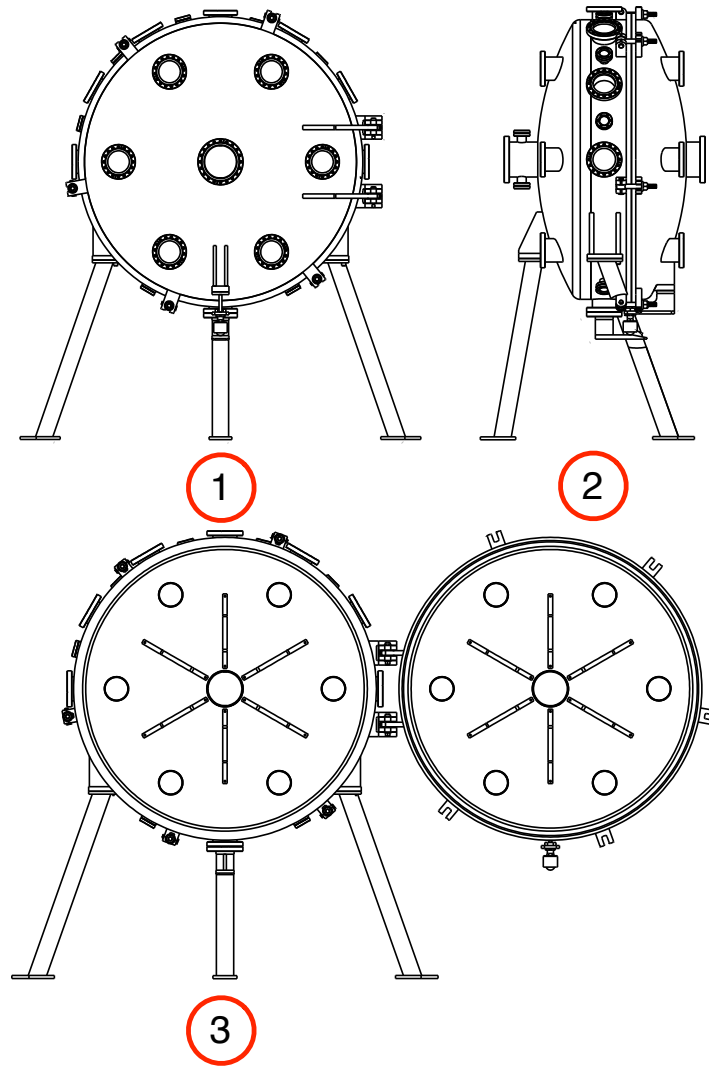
Mechanical drawing of the rf carpet test stand used for ion transport (1) Front view of closed test stand. (2) Side view of closed test stand. (3) Front view of open test stand. The inner diameter of the chamber is 1.2 m.
